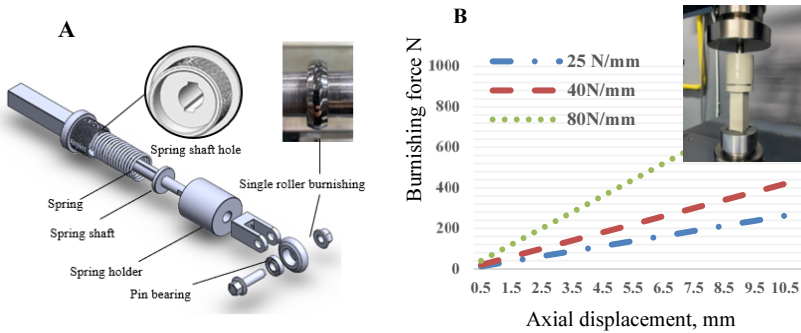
The 3D exploded view of a single roller burnishing tool (A) and spring compression test (B)
